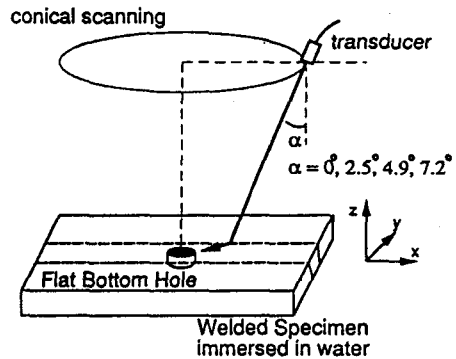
Schematic diagram of the TOFE sizing setup for 5mm diameter flat-bottom holes fabricated in a mild steel welded specimen (immersion testing)
